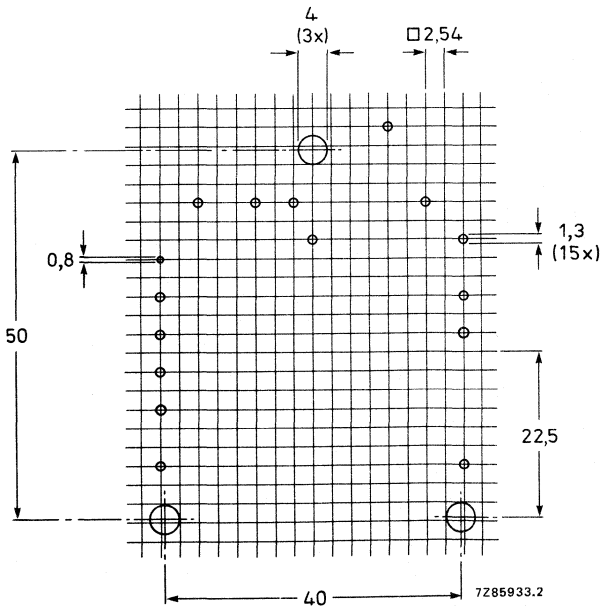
Hole pattern for mounting on a printed-wiring board (solder side).
